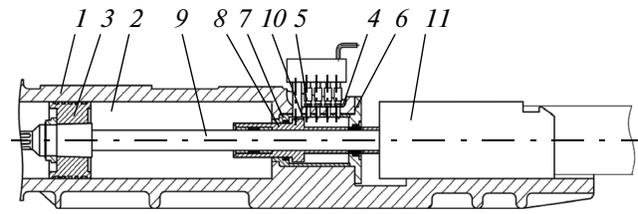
Modernized braking chamber: (1) housing of supply system; (2) air chamber; (3) air piston; (4) hydraulic chamber; (5) choking aperture; (6) flanged lid; (7) braking bush; (8) hydraulic piston.
